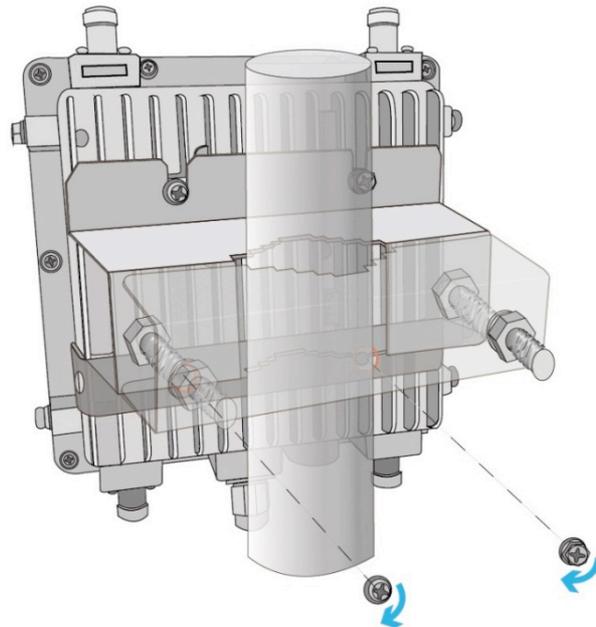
View 2 of Installing AP on the Mounting Bracket
